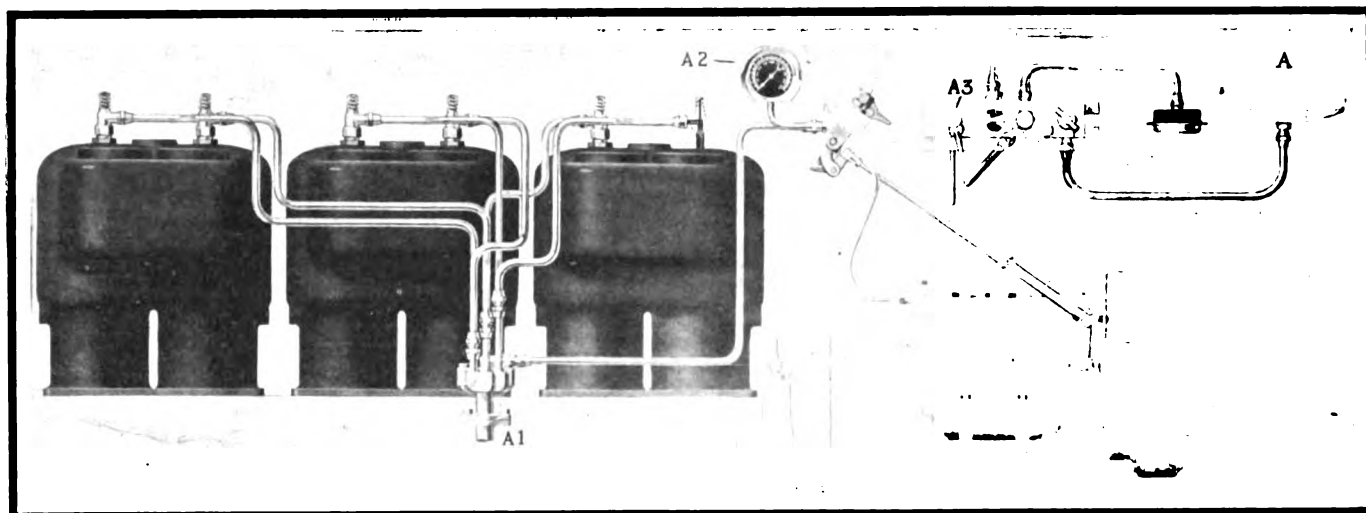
Schematic view of self-starter and location of pump, air tank and distributor
